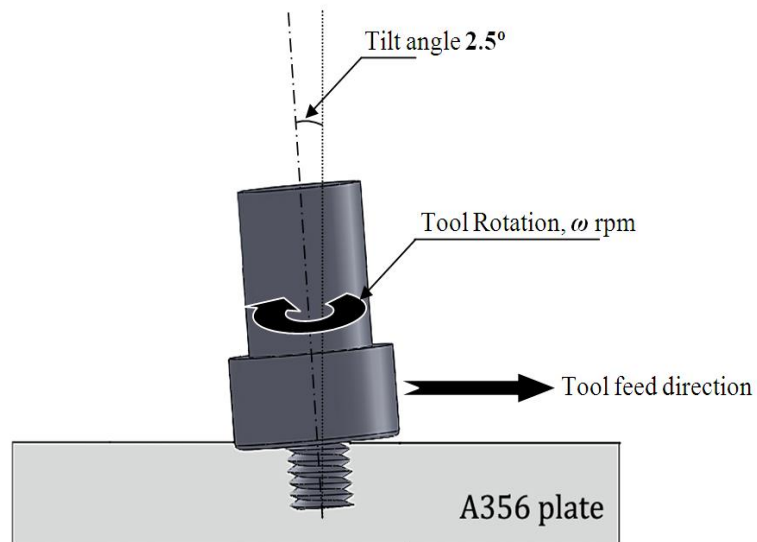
Schematic illustration of the process of tilting the tool, tool plunge and tool feed.
